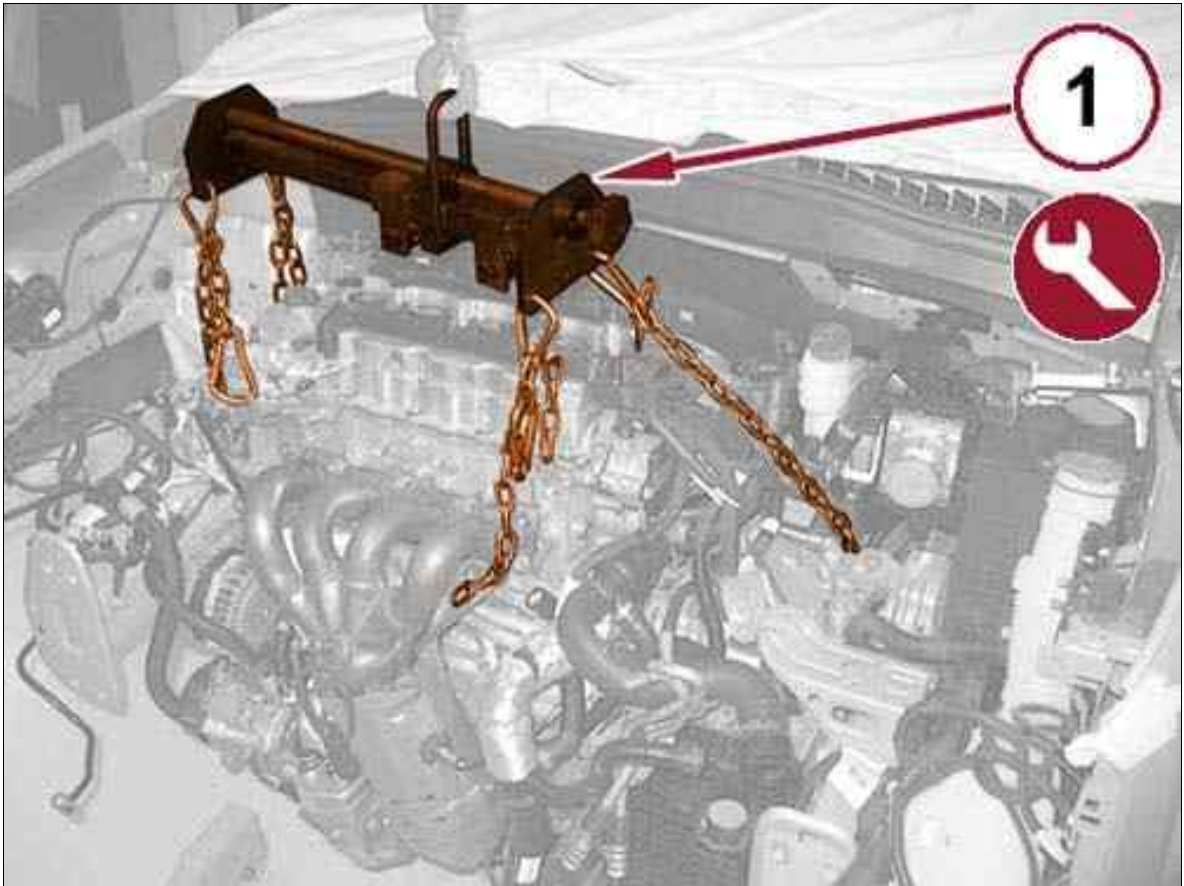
Engine Lifting Bracket & Engine Timing Cover Bolt
